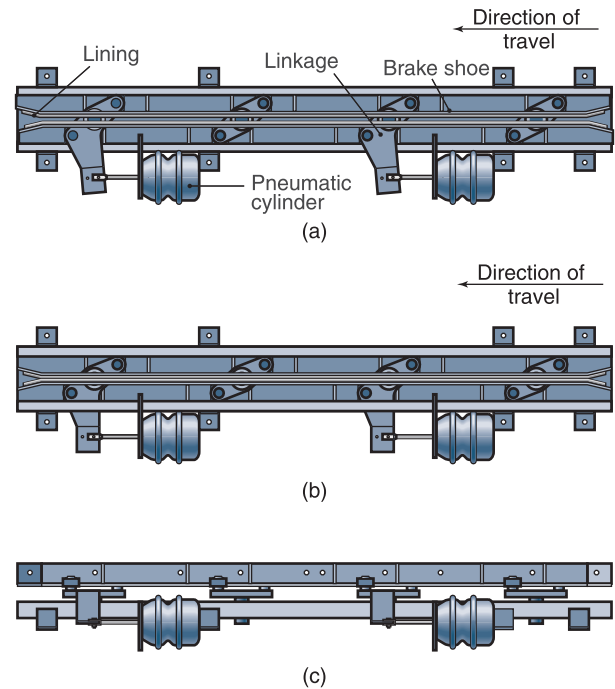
Schematic illustration of a roller coaster brake system. (a) Components of the roller coaster and shown when the brake is not engaged, as seen by the gap between the liner pads; (b) top view of an engaged brake; (c) side view of engaged brake.
